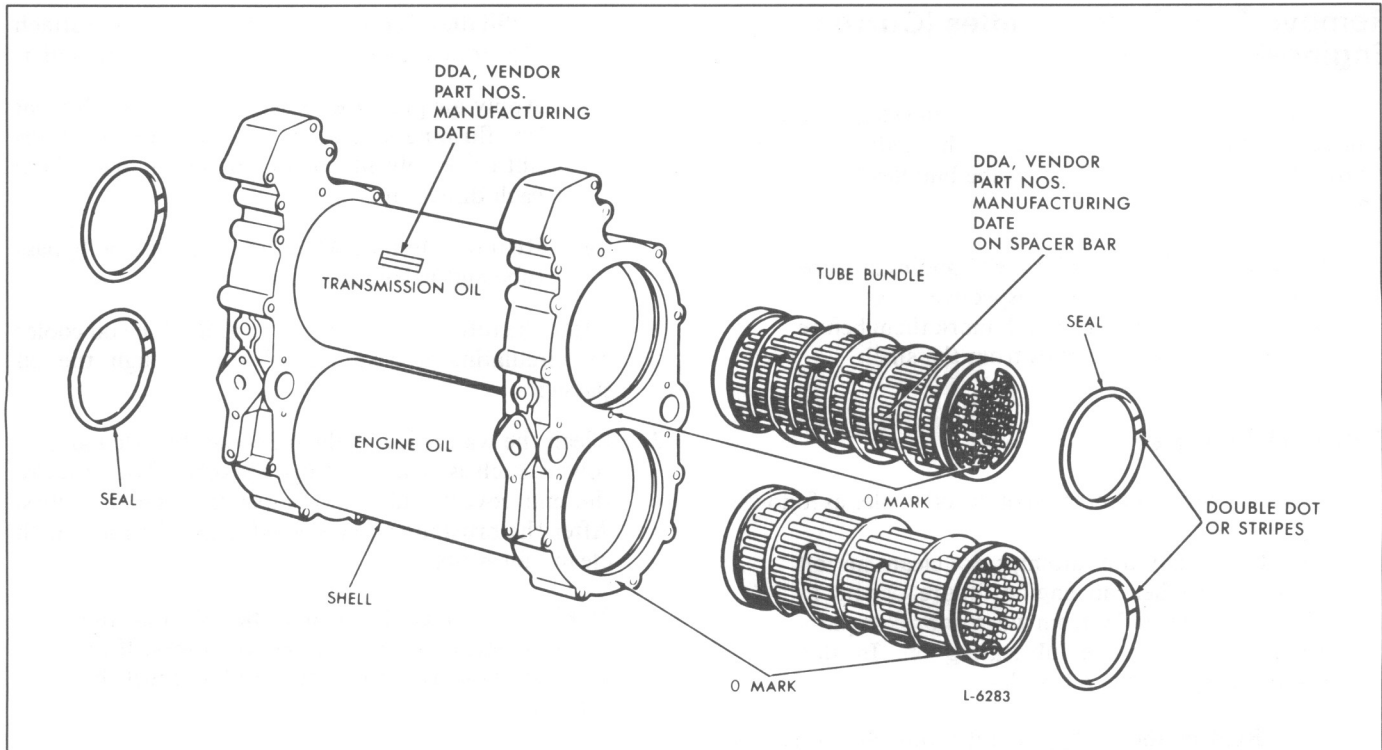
Tube-Type Oil Cooler (Removable Bundles) and Relative Location of Parts
